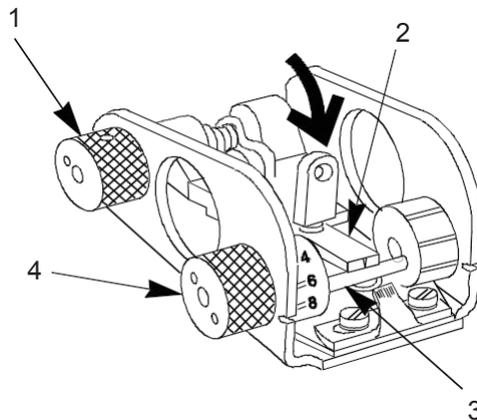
Elevation Knob Assembly, Center Sight Leaf Assembly.
